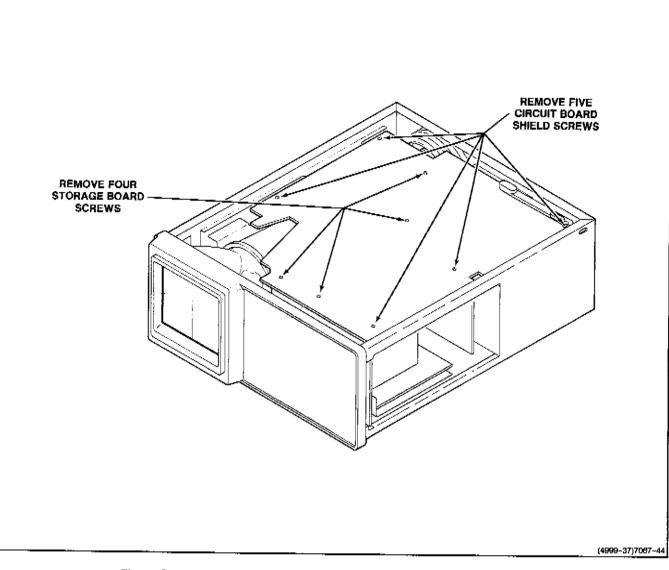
Location of screws and spacers on the Storage circuit board.
